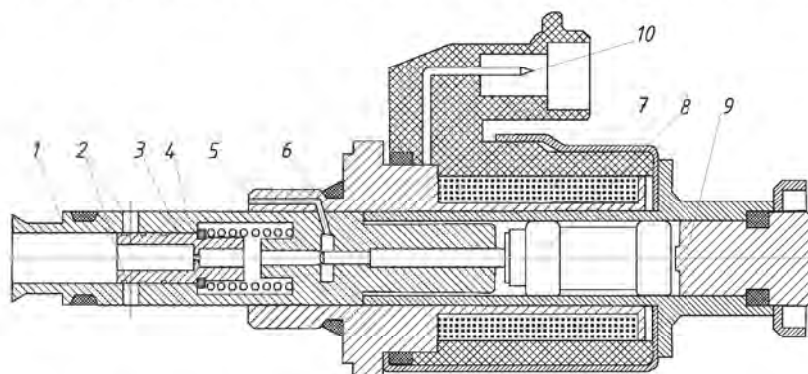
Control oil pressure control valve: 1 – valve housing; 2 – oil drain holes; 3 – spool piston; 4 – throttle hole in the spool piston; 5 – line for draining oil from the differential cavity; 6 – shut-off cone of the system for releasing pressure from the differential cavity; 7 – solenoid coil; 8 – anchor; 9 – anchor stop; 10 – terminal for connecting to the electronic control unit (adapted from [46])
